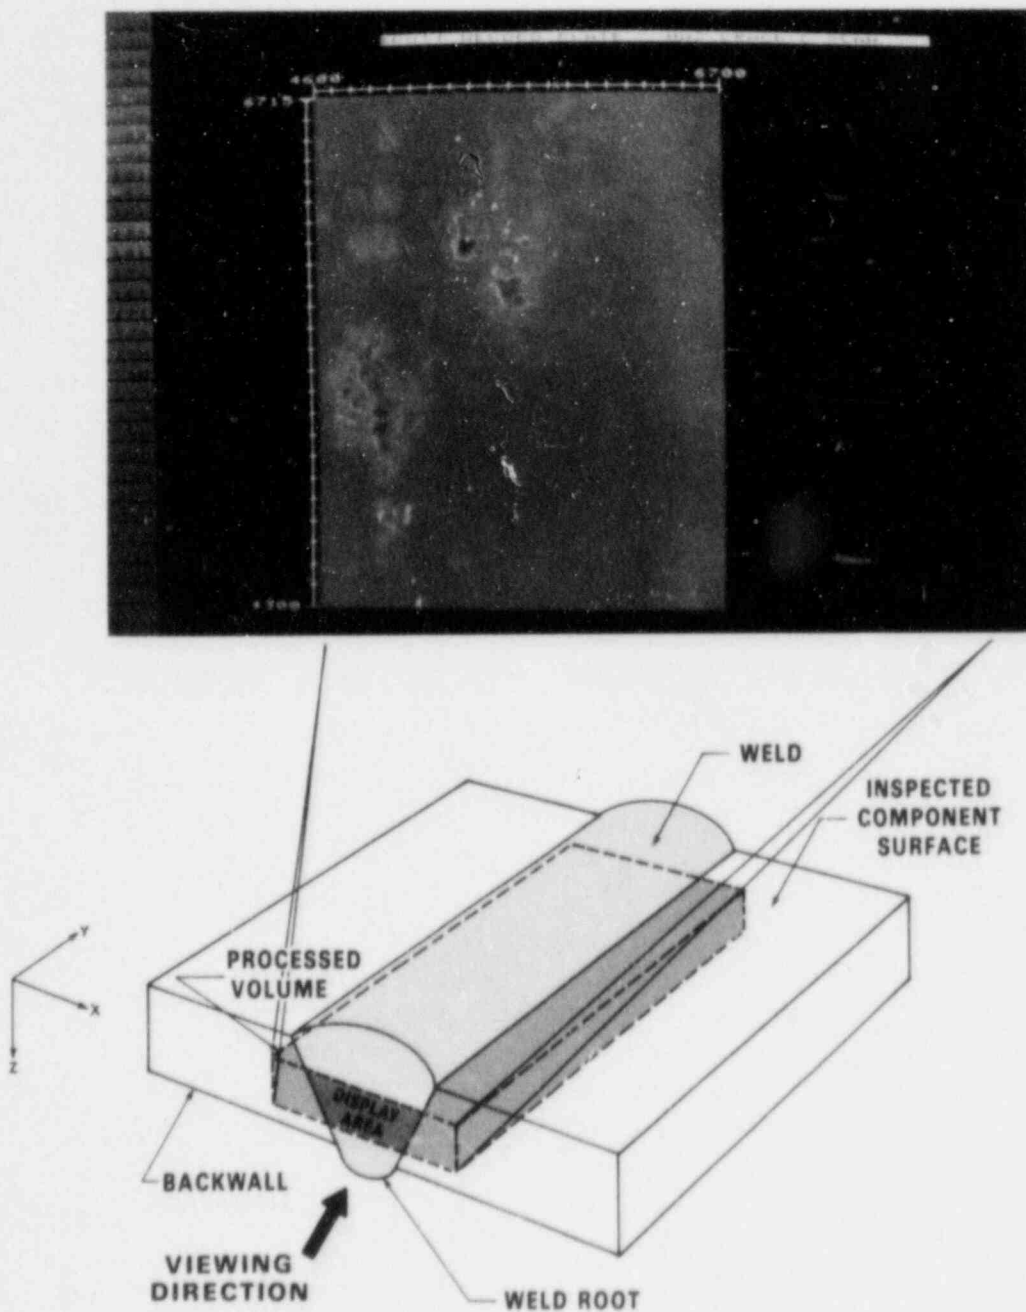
BUTT-WELDED CARBON STEEL PLATE SPECIMEN - WELD CRACK/PITTING
